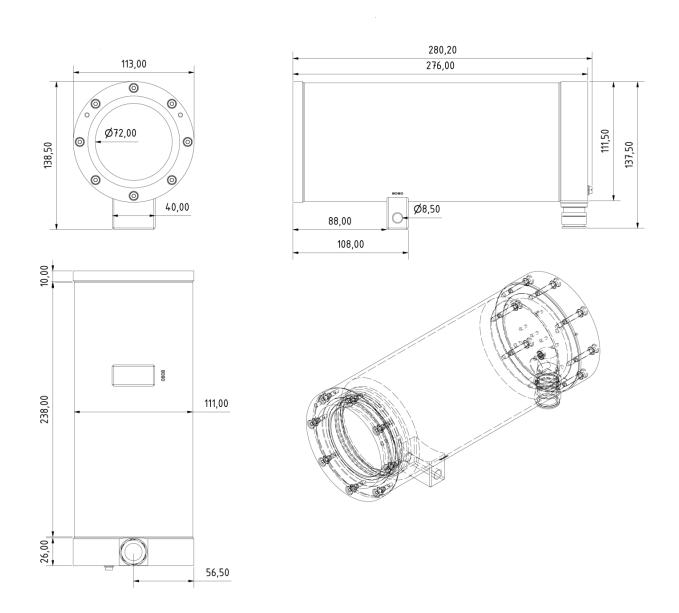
Dimensions of the T08 ExCam IP13xx with K2 flange
